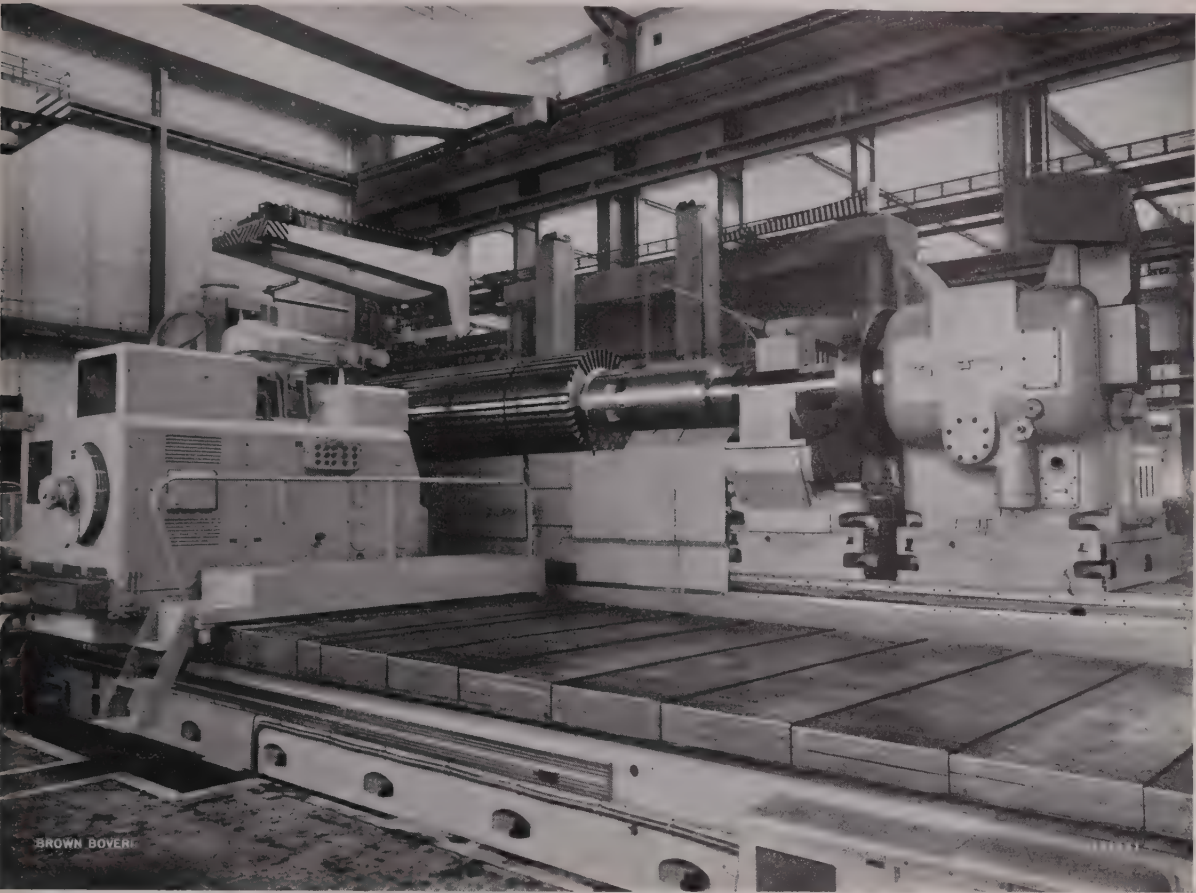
Rotor-slot milling machine (Gebr. Heller, Nürtingen, Germany)
